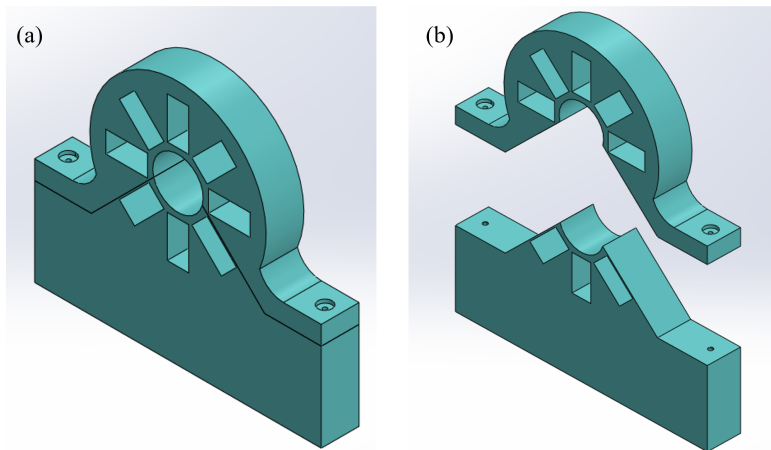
Side holder assembly: (a) Isometric view, and (b) exploded view.
